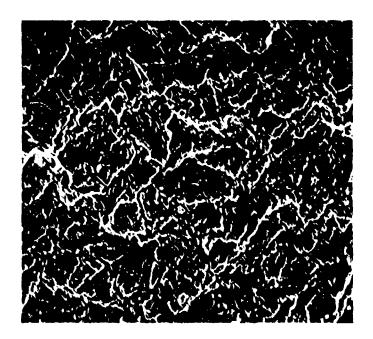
Fatigue region of fracture surface of an A-514 weldment containing porosity, 1380x.
